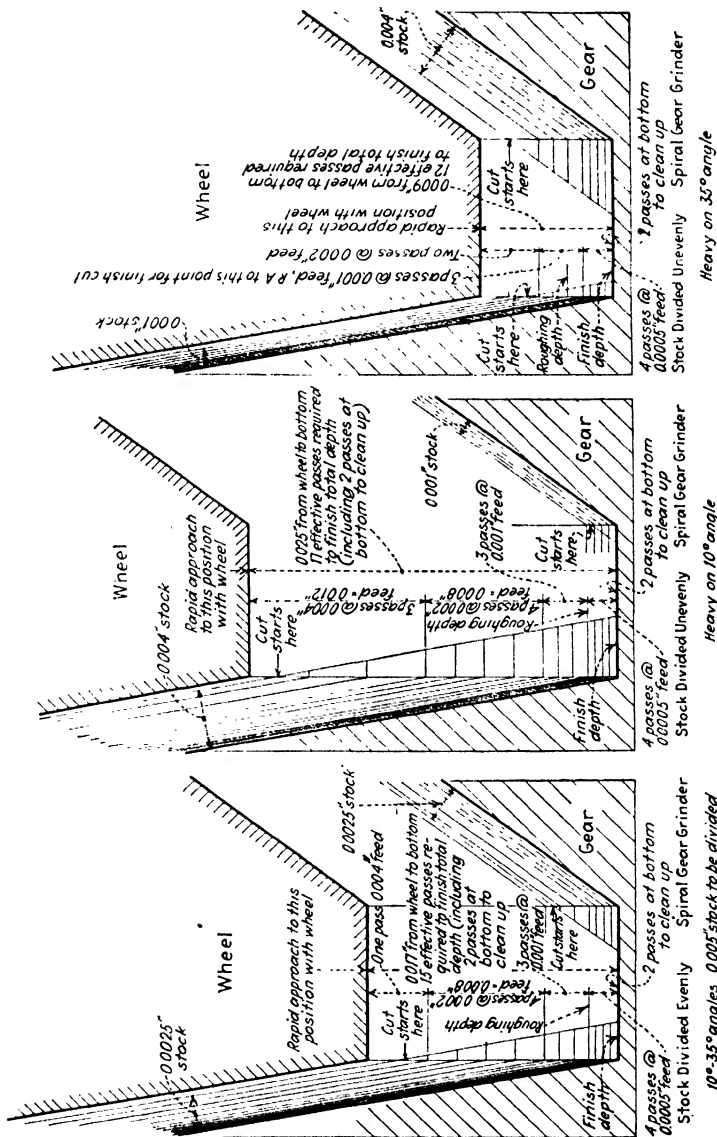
Stock control, showing metal removed from each side of tooth.
